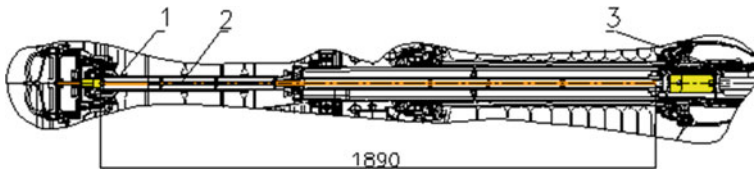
Placement of the oil pipe in the low-pressure rotor: 1—tube; 2—oil pipe; 3—inter-shaft bearing
